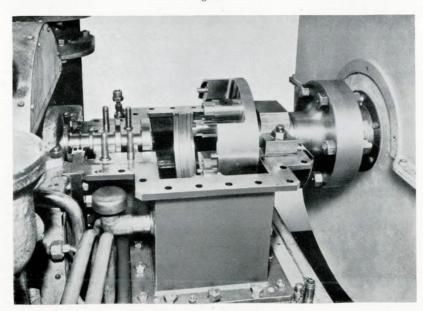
(c)—View of gearcase and planet carrier after dismantling gear
